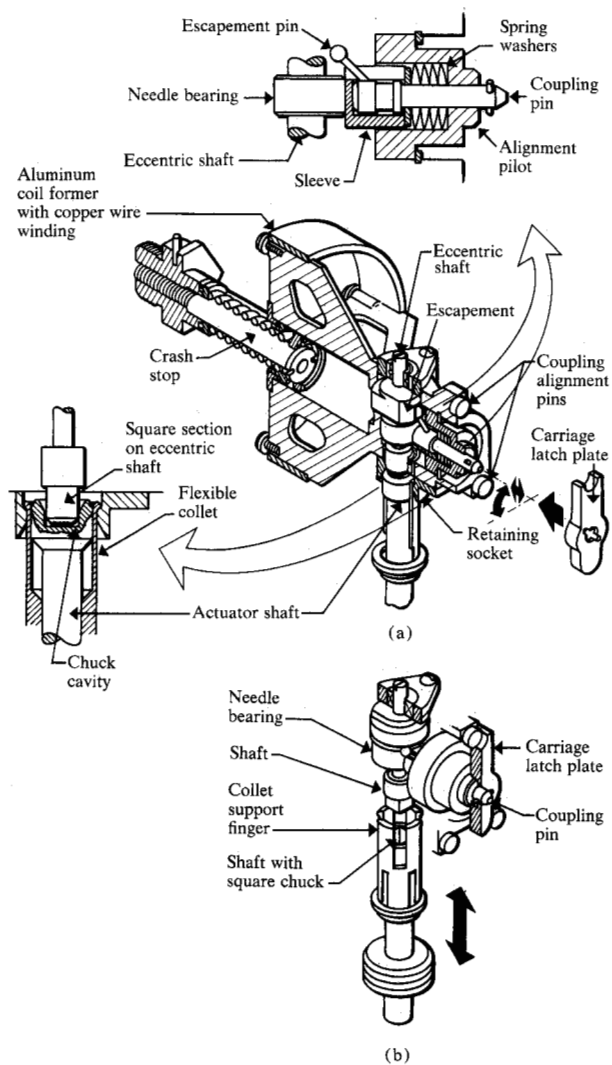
Moving-coil coupling assembly. (a) View showing how "fingers" engage socket and square chuck engages eccentric shaft; (b) simplified view with carriage latch plate coupled and support fingers and square chuck withdrawn.
